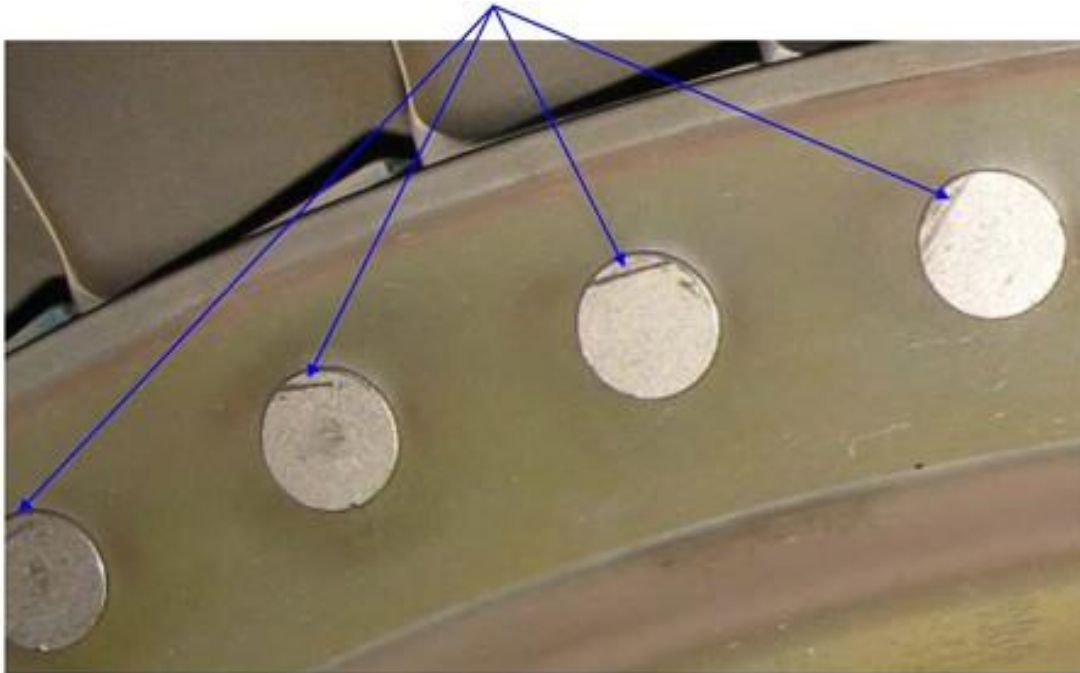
, Witness Marks Showing Incomplete Rivet Head Support
